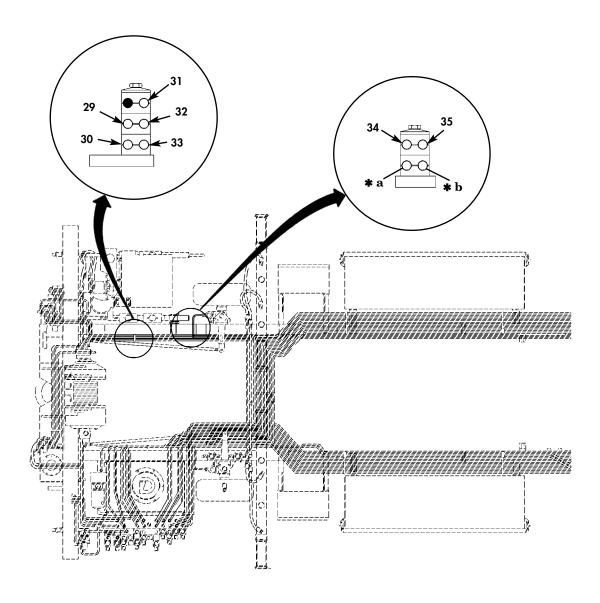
Pallet Hydraulic Tubes (Sheet 2 of 3).
